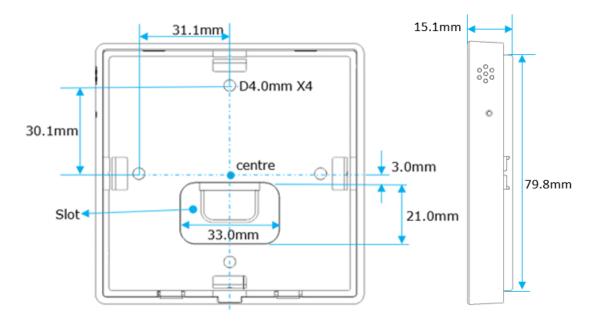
Rear Cover's Slots and Screw Holes Drawings (Back and Side View)
